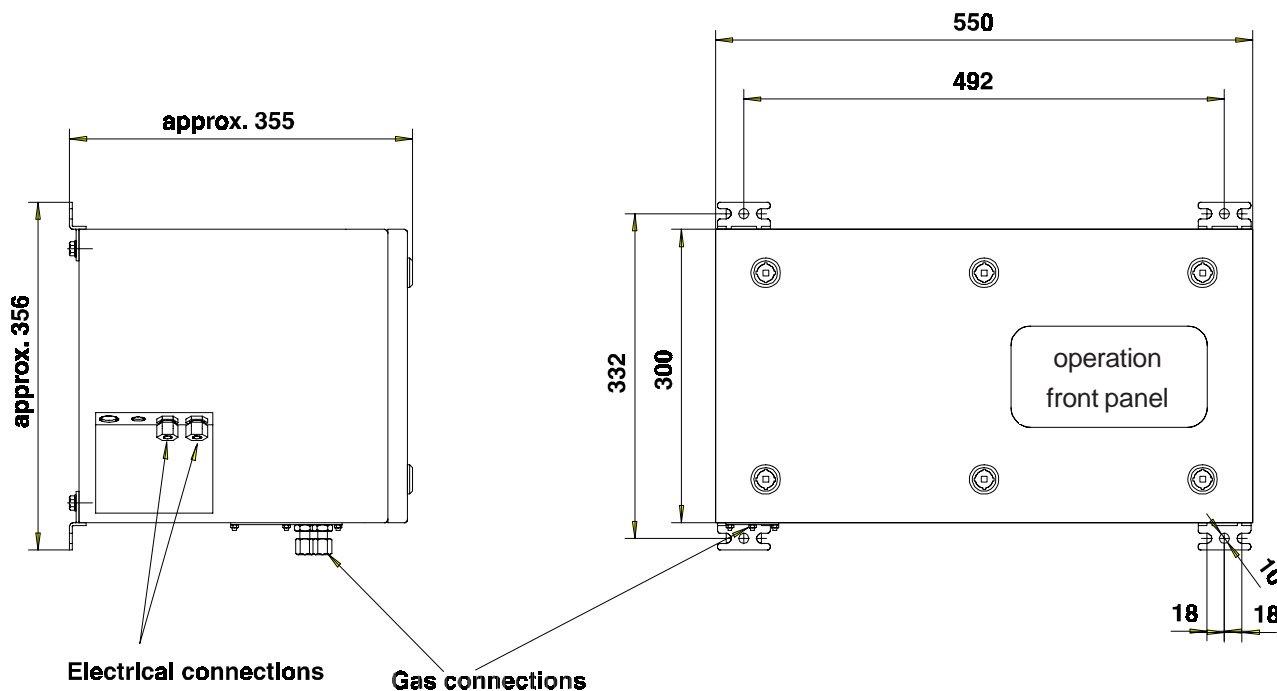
Dimensional sketch / Drill drawing BINOS® 100 F [all dimensions in mm]
